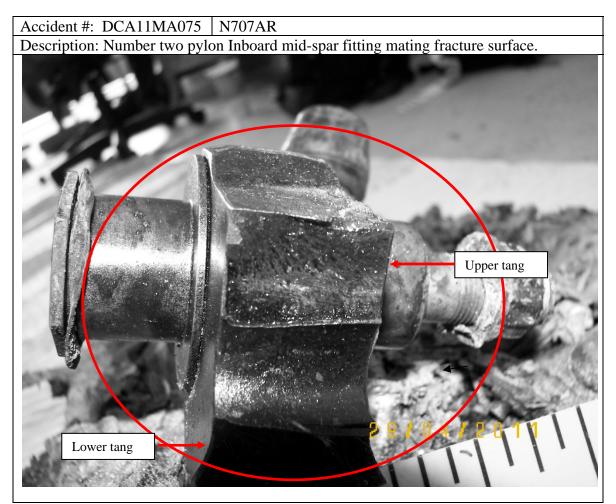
Number two pylon Inboard mid-spar fitting mating fracture surface
